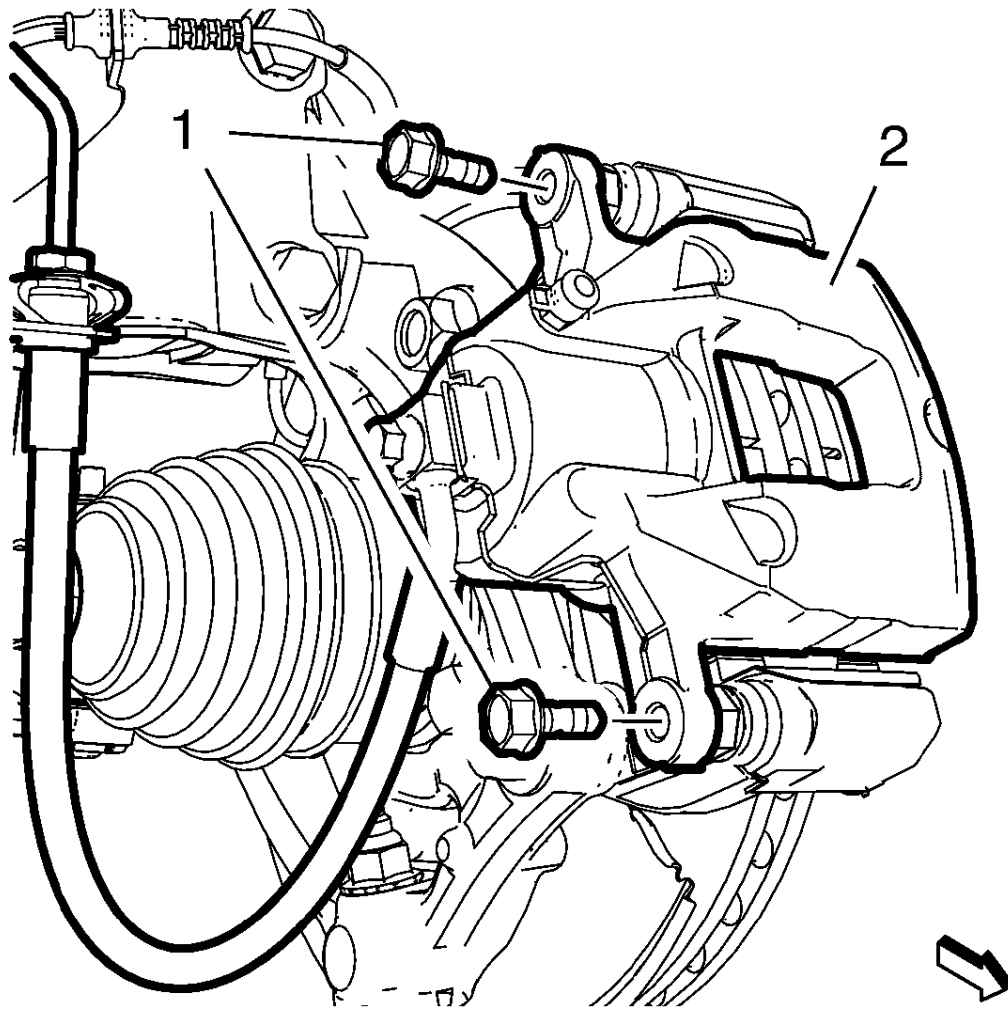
Front Brake Caliper And Guide Pin Bolts
